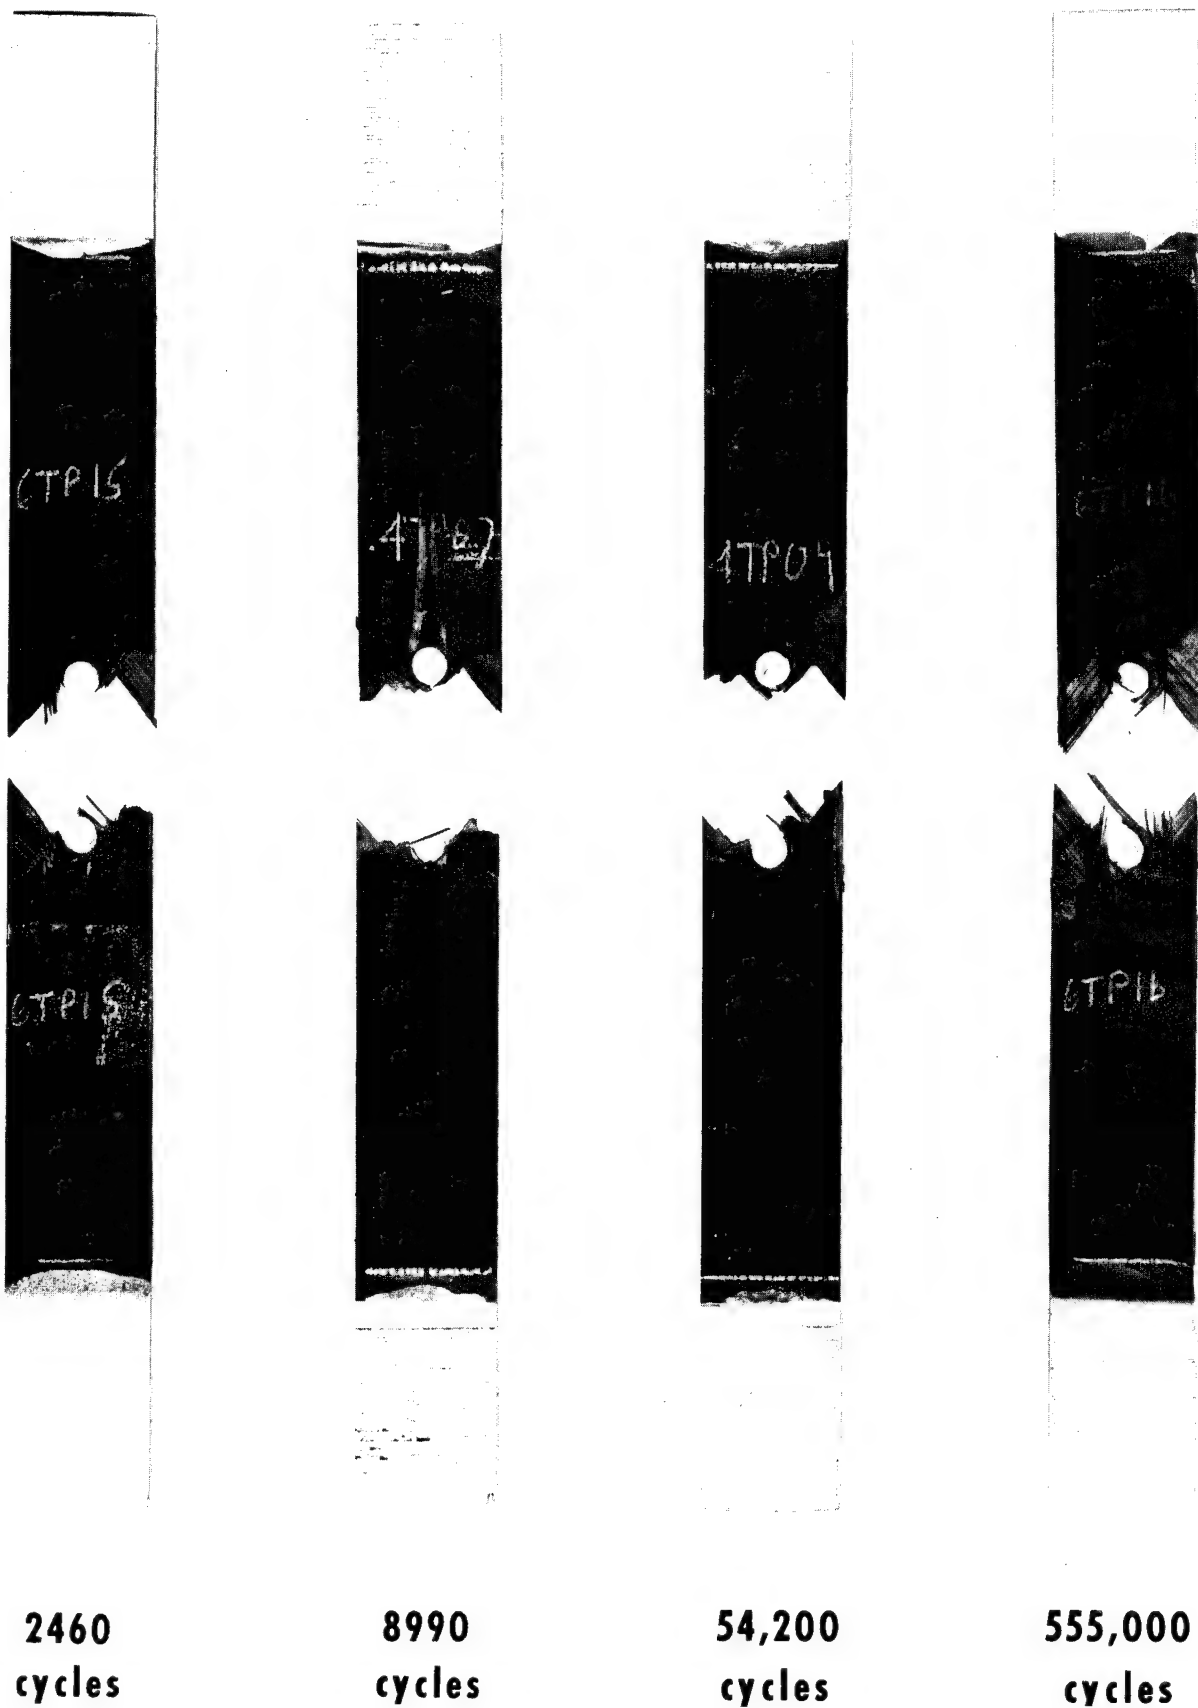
Typical Formed Hole Fatigue Failures
